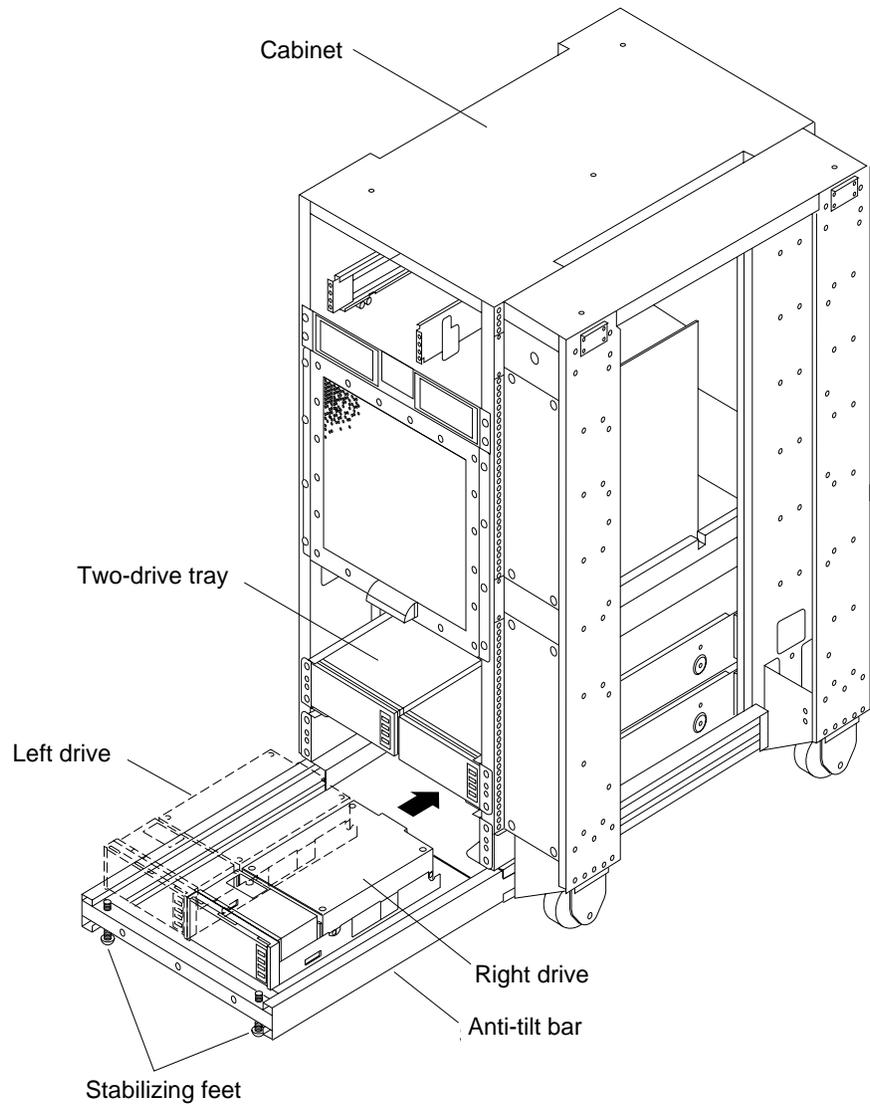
1 Gbyte & 911 Mbyte IPI Disk Drive Removal and Replacement
